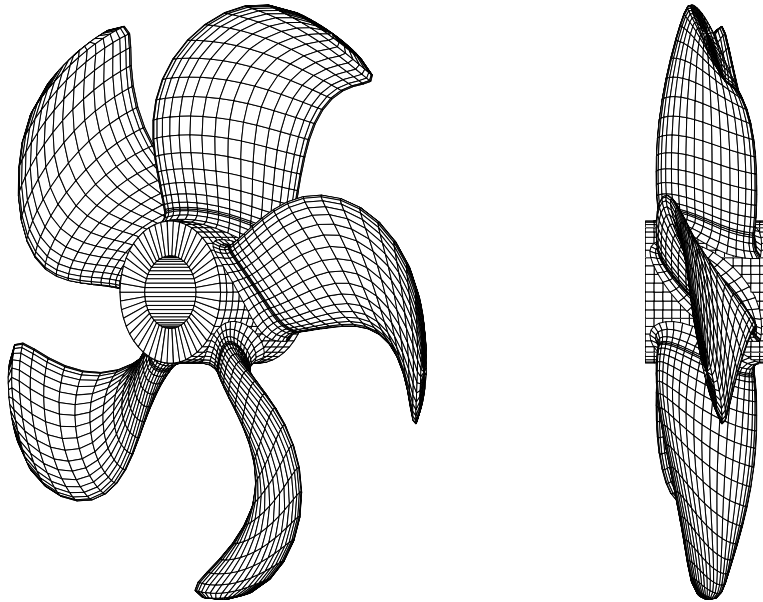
Final-Design RCRV Rotor - Starboard Propeller
